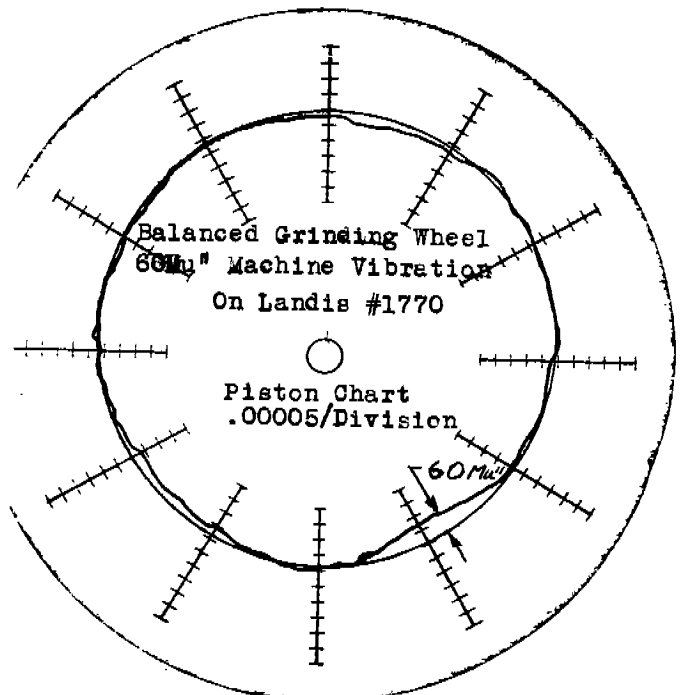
PISTON PROFILE WITH GRINDING WHEEL BALANCED
